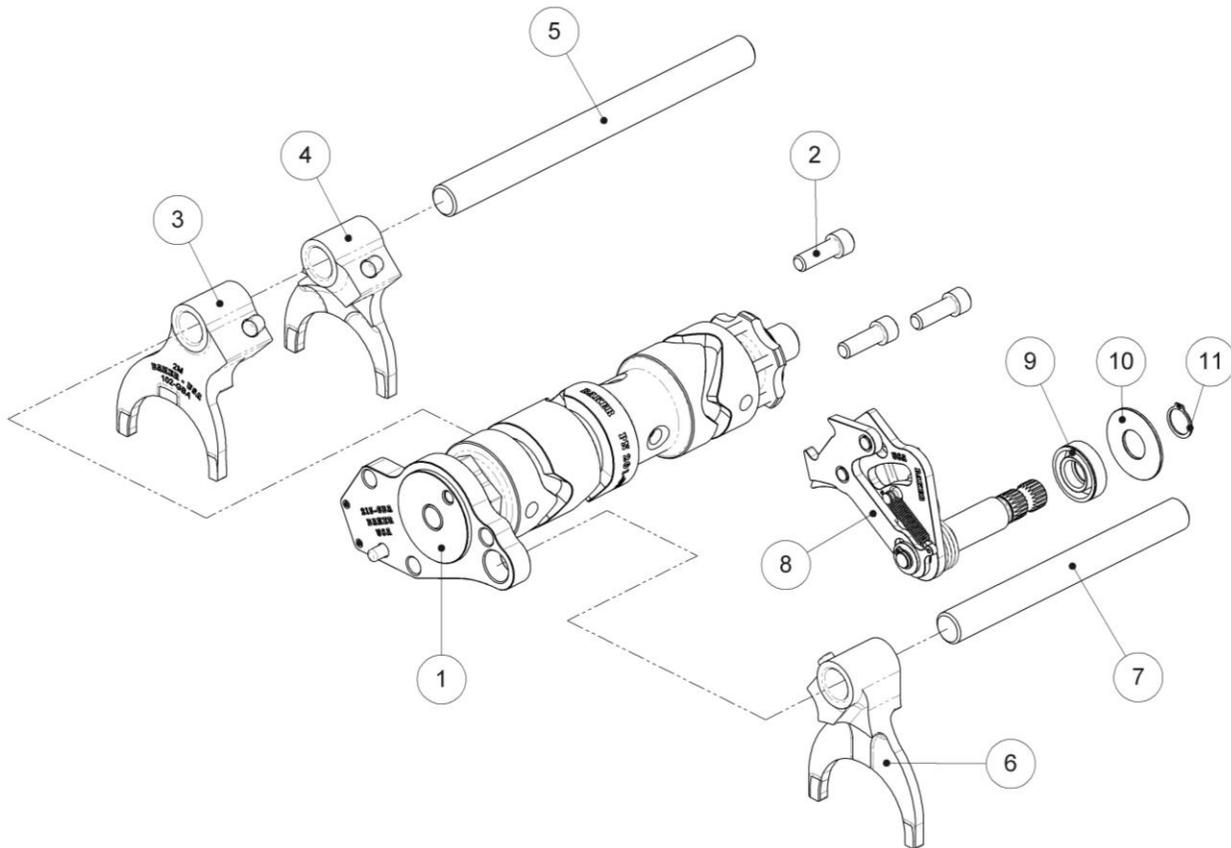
| EXPLODED VIEW, SHIFT SYSTEM
